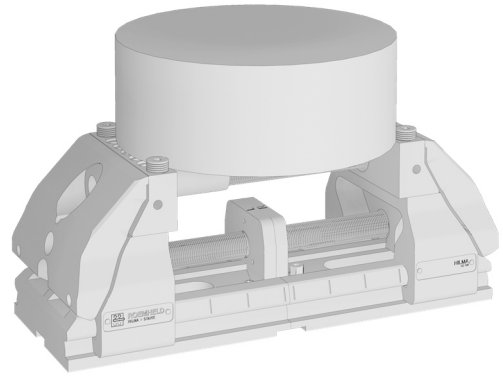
Clamping jaw with round clamping bolt and clamped workpiece
